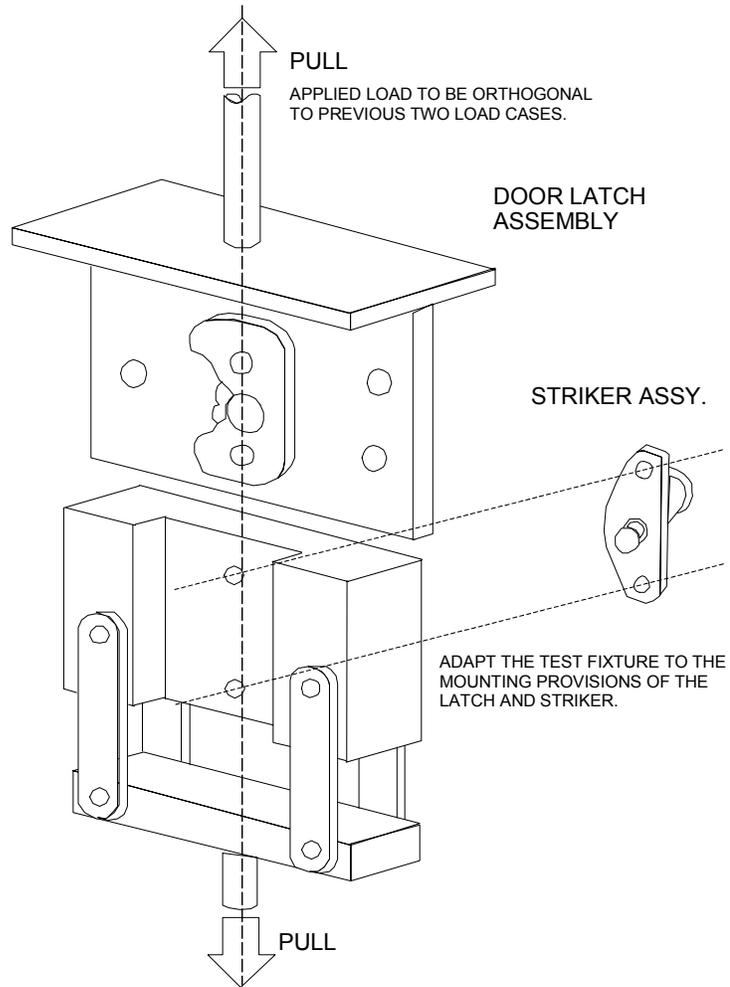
Door Latch – Tensile Testing Fixture for Load Test 3 (Back Doors Only)
